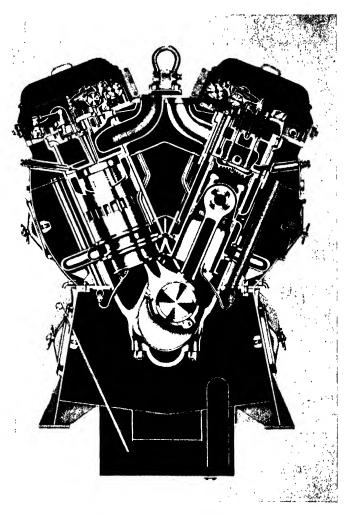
Cross-section of Electromotive V-type two-stroke engine.
